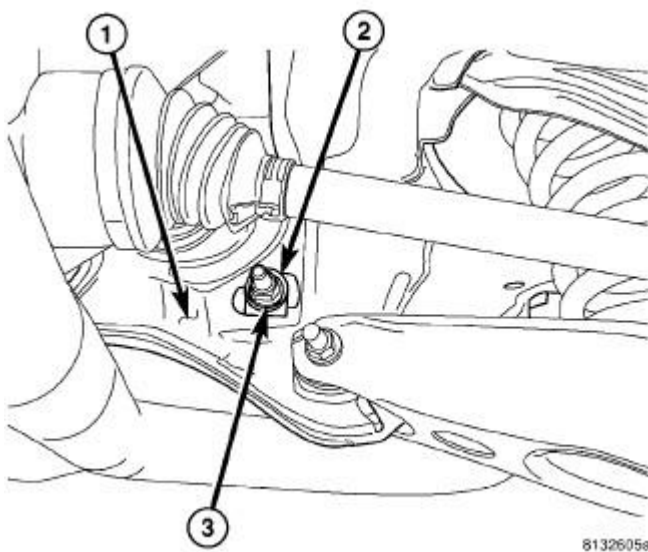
REAR TOE ADJUSTMENT BOLT NUT
